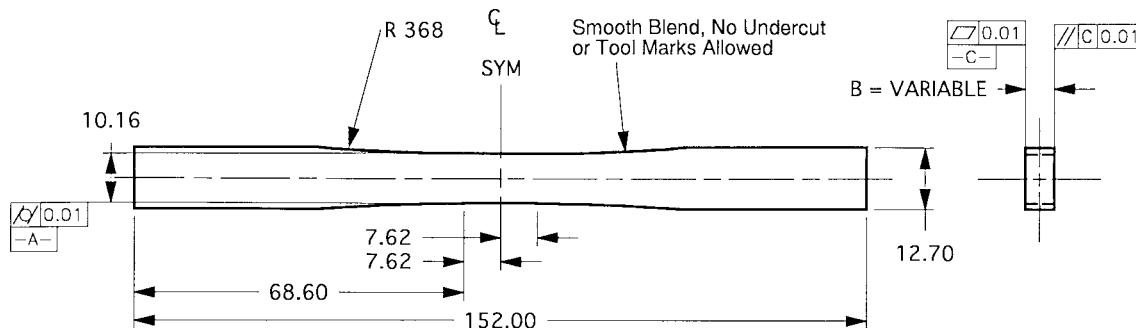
Example of Contoured, Face-Loaded Test Specimen Geometry (11)
